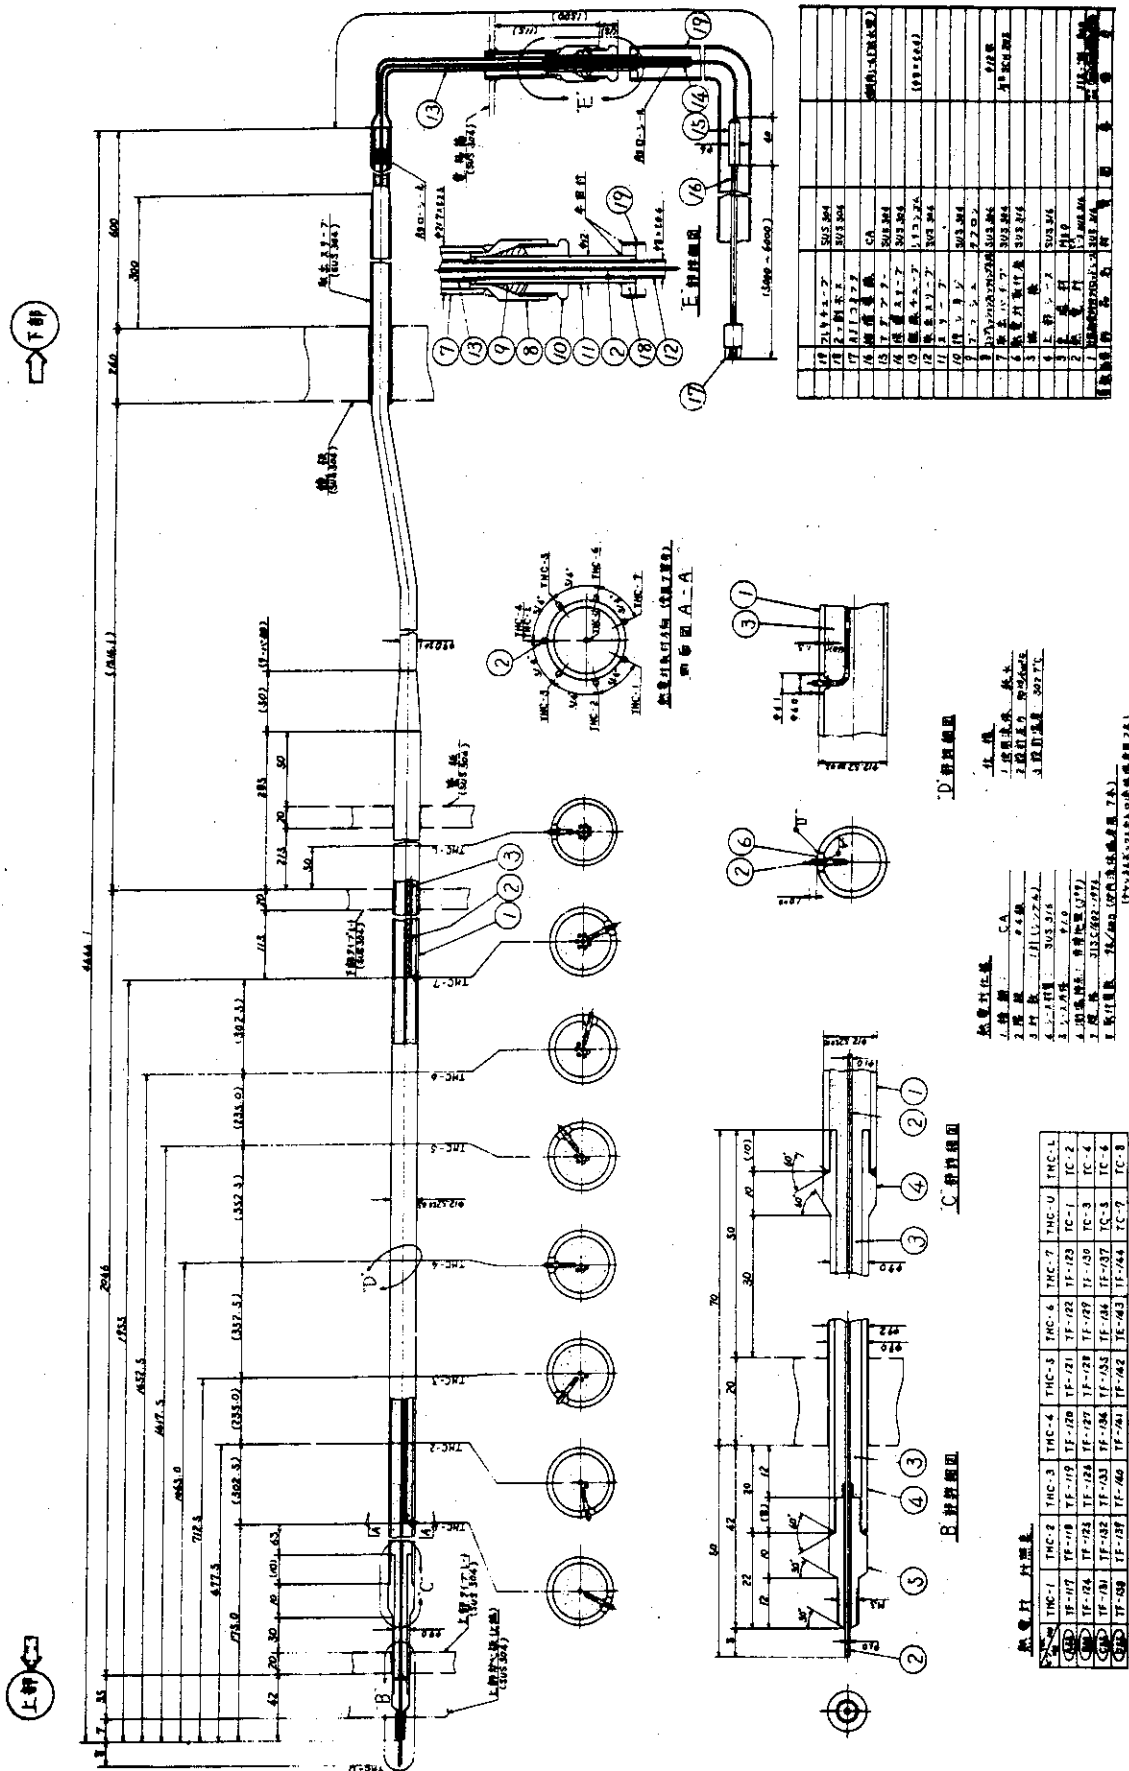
Composition of Heater Rod with 7 T/Cs.
